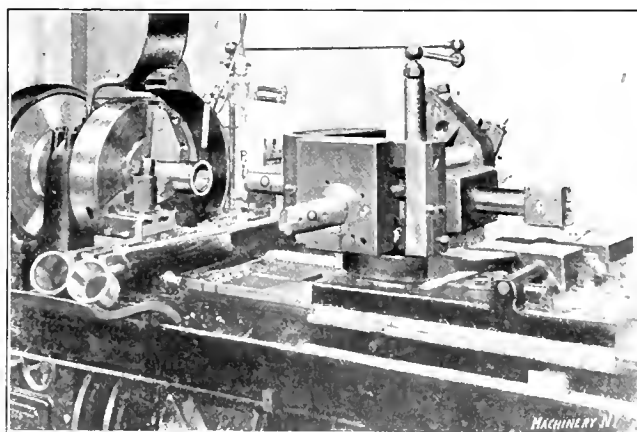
Boring and Facing the Bottom of the Bowl with Turret Tools manipulated by the Cross-slide
